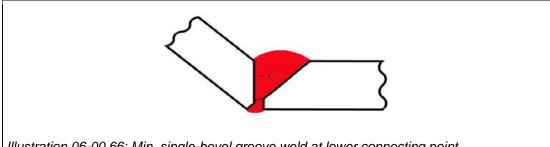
66; Min. single-bevel groove weld at lower connecting point
